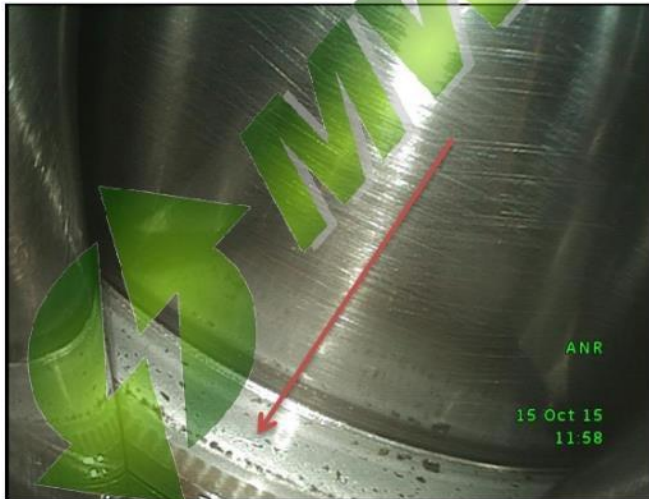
shows the bearing of the first planet wheel. No irregularities.
